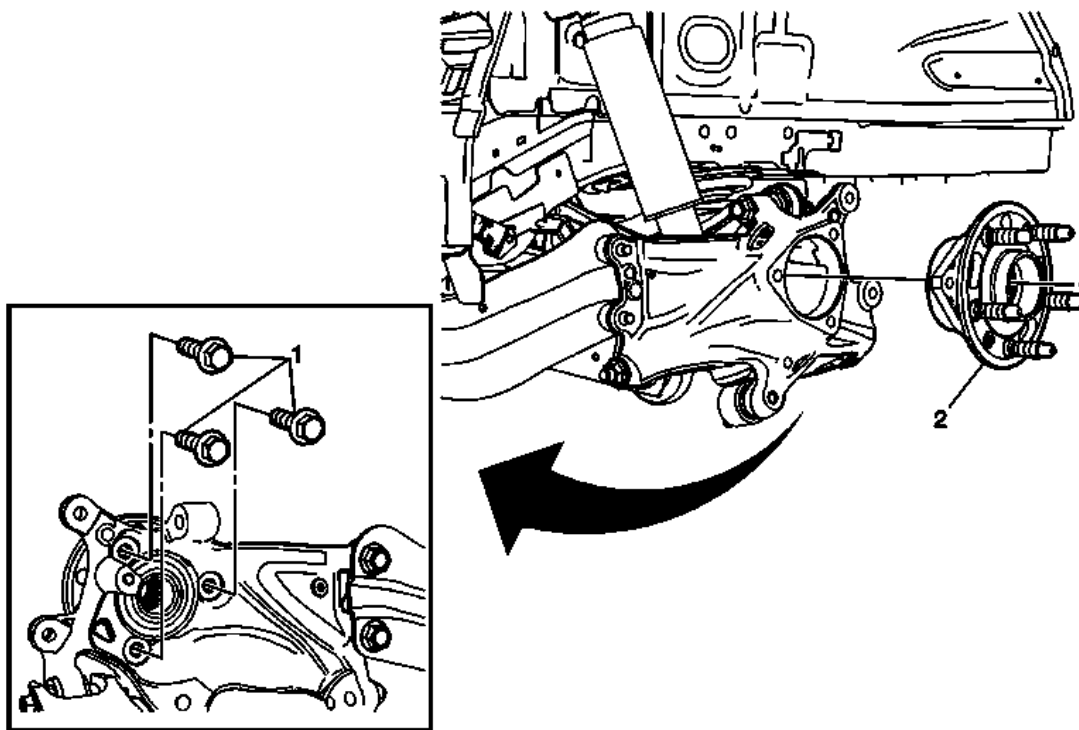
Rear Wheel Bearing And Hub (GNC)
